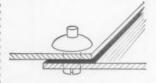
Inserted in hole, Southco Rivets are quickly set by driving pin with hammer. No special tools are required. Bucking is not necessary.
